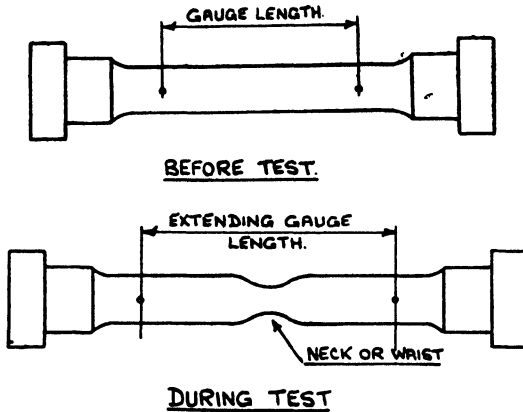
CYLINDRICAL TEST PIECE BEFORE AND DURING TEST
